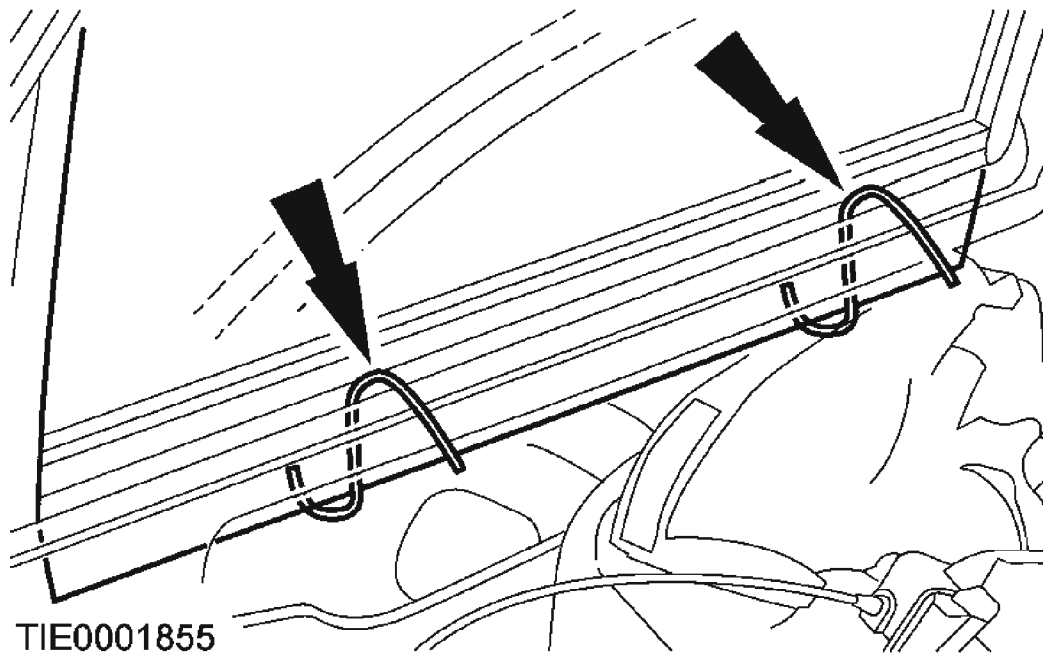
Removing Front Door Window Glass Clamp Bolts
